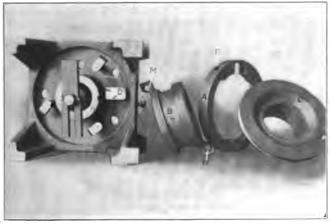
Drill Jig for Parts of Friction Clutches shown at the Right
